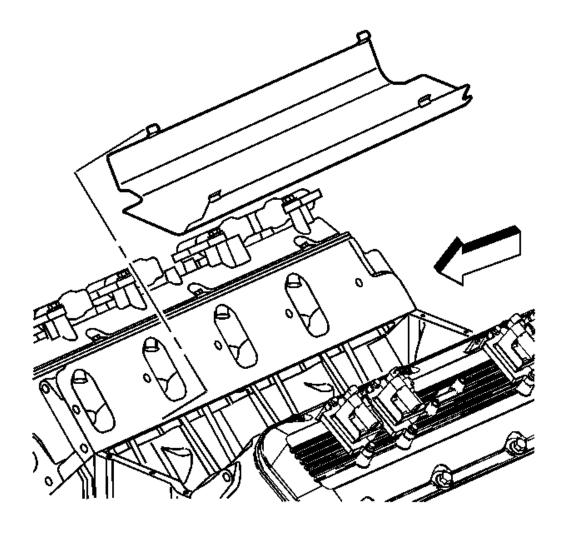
View Of Intake Manifold End Seals Courtesy of GENERAL MOTORS CORP.
